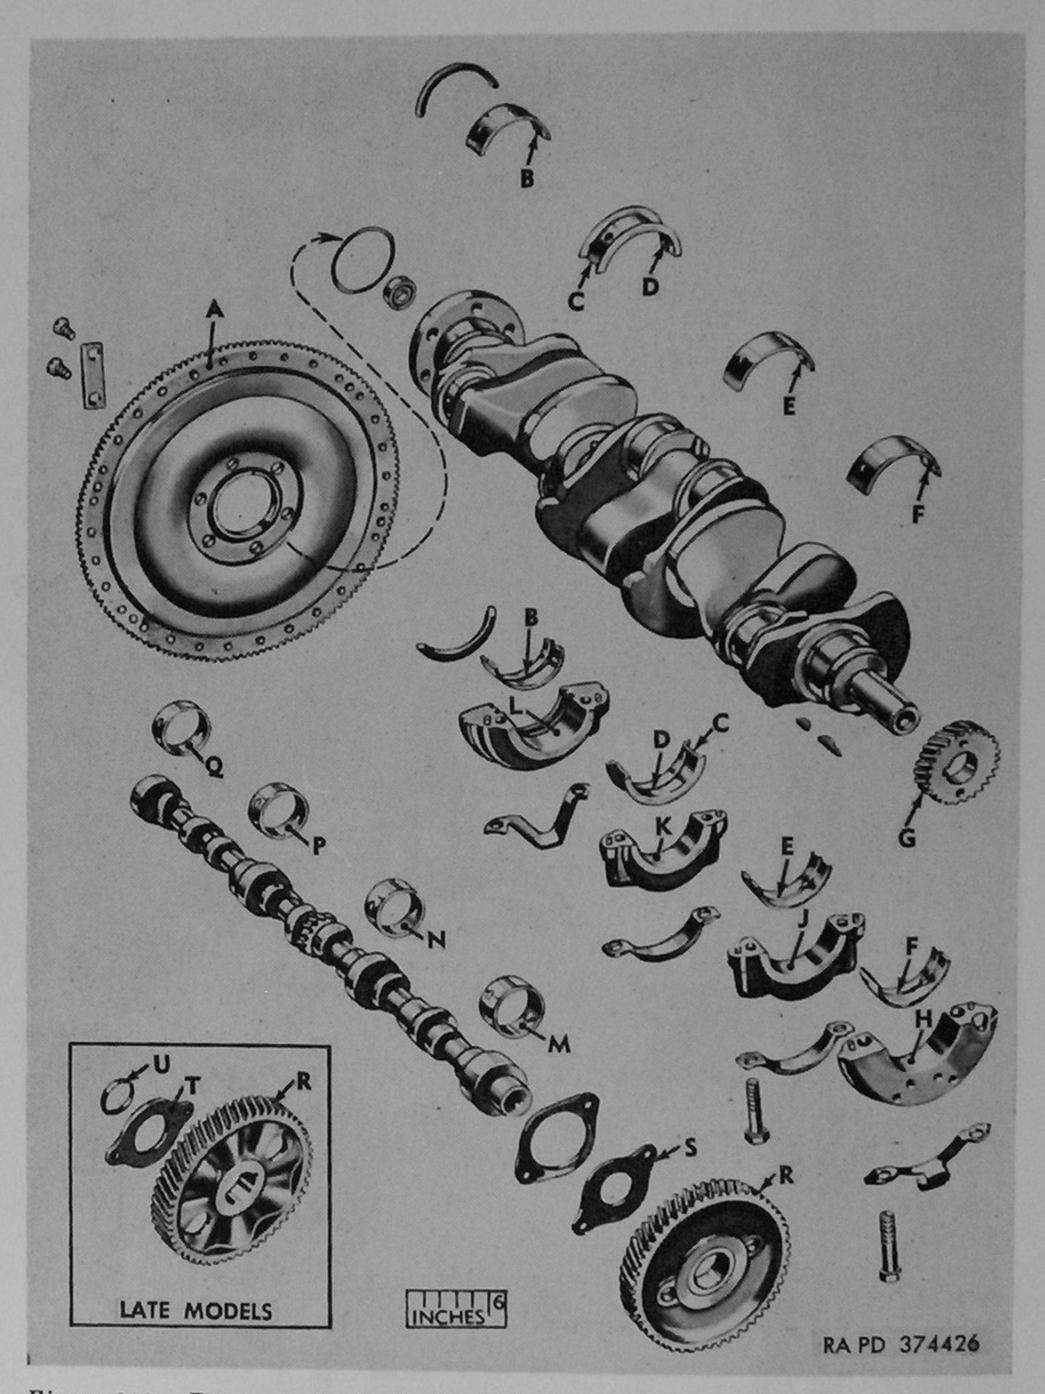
Repair and rebuild standard points of measurement for camshaft and crankshaft bearings.
